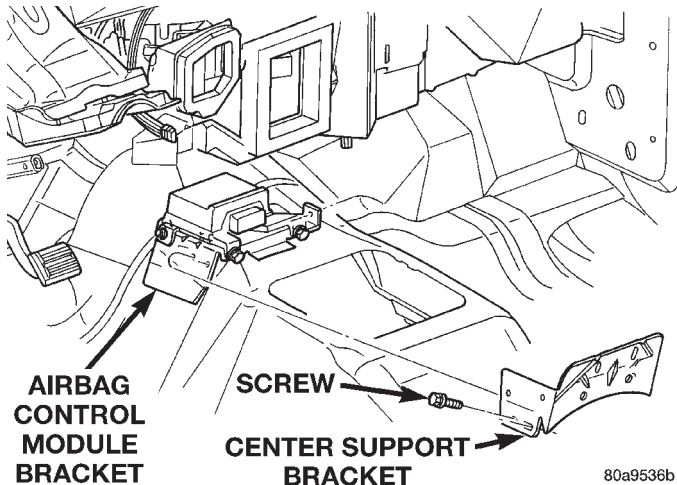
Instrument Panel Center Support Bracket Remove/Install
